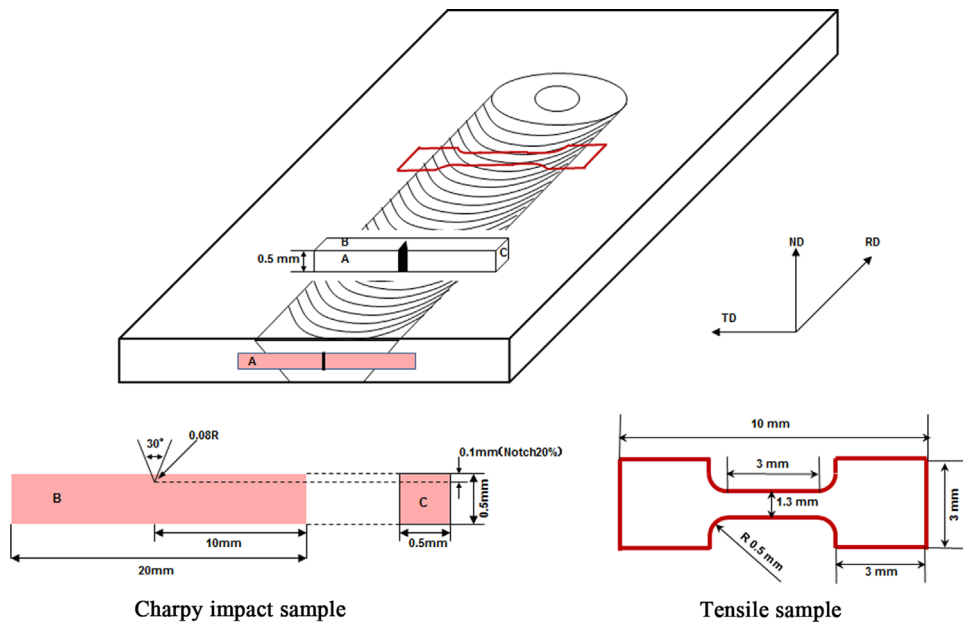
Schematic illustration of the tensile and Charpy impact specimens.
